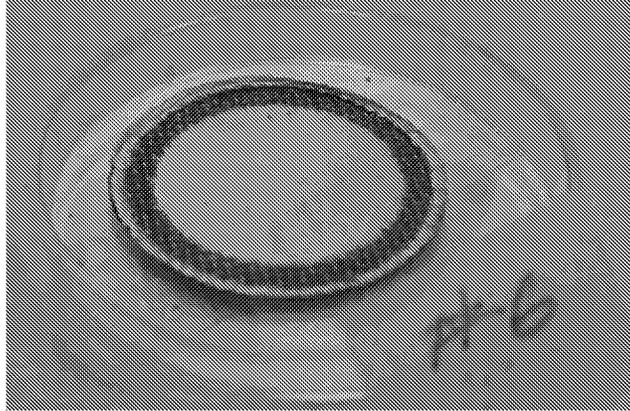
Damage to Cu film caused by pressure from o-ring seal.
